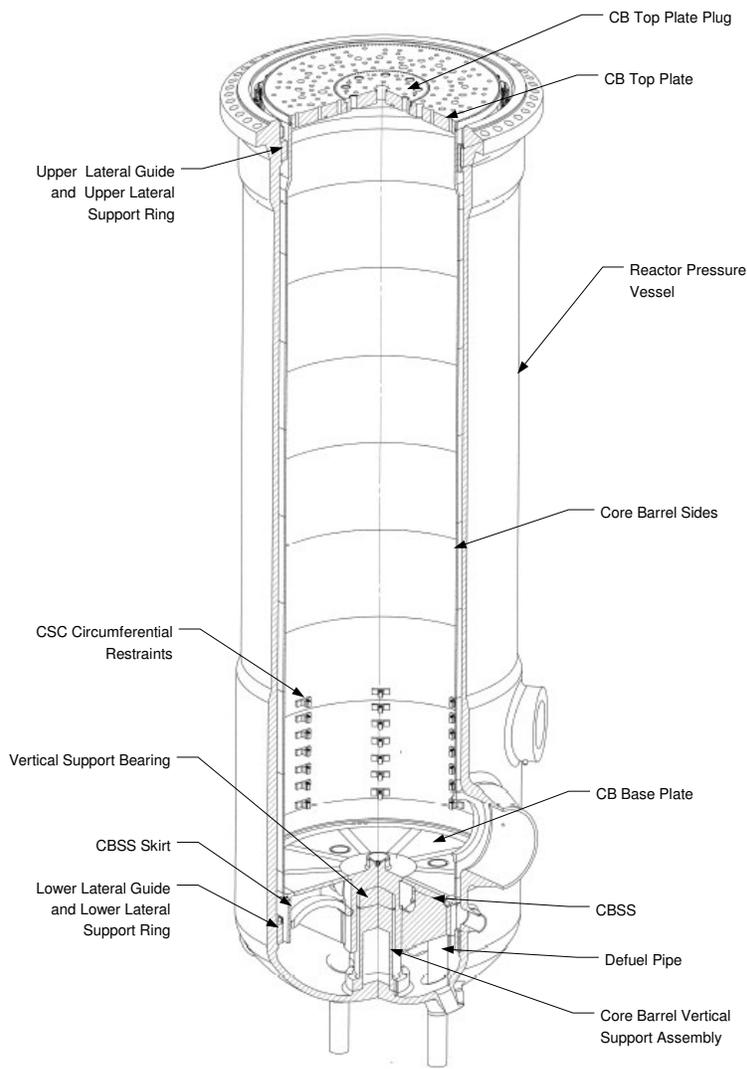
Core Barrel Assembly within the Reactor Pressure Vessel
